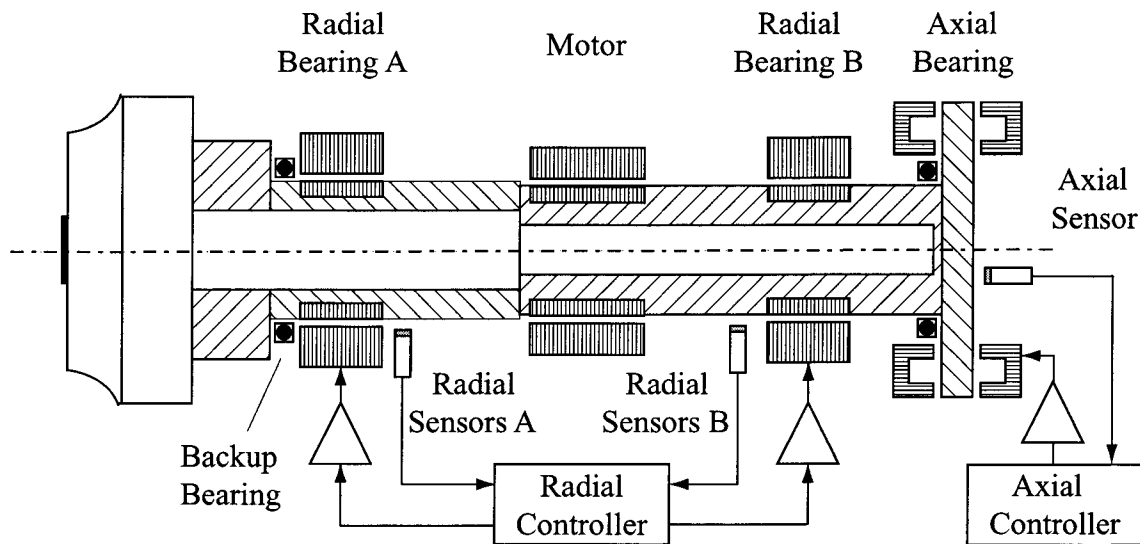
AMB Rotor System with Axial and Radial Bearings and Motor Drive
